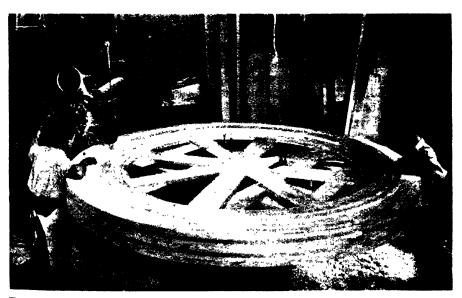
View above the operator's head during the turning and shaping of the 10-ft. Diameter wheel on the pattern miller
